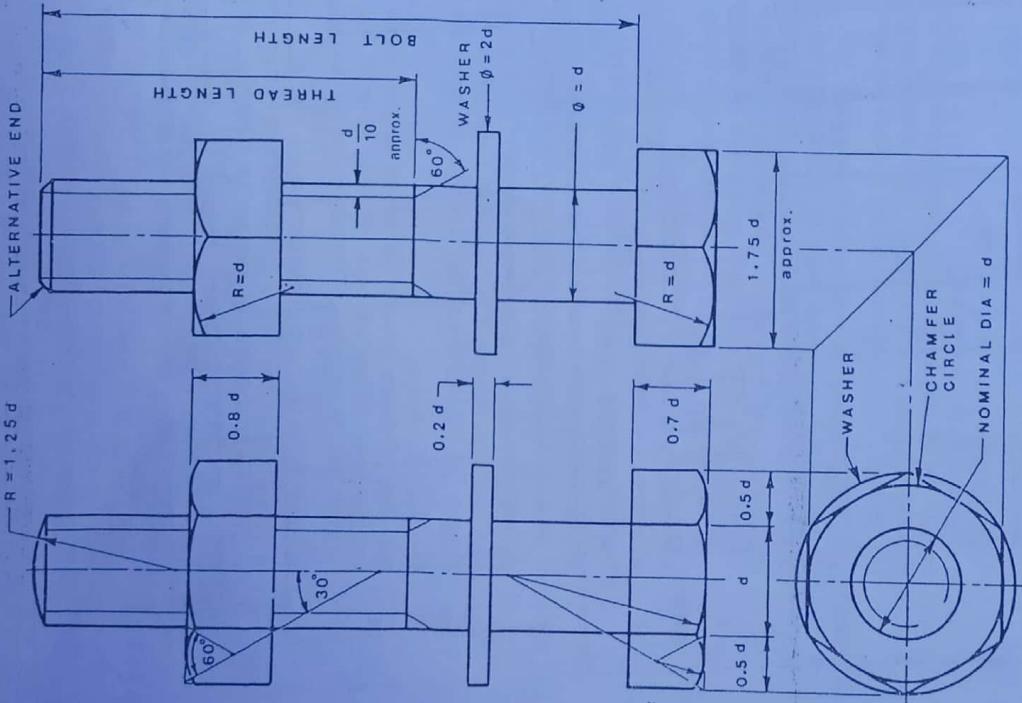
Completed views of a nut and bolt showing thread run-outs
